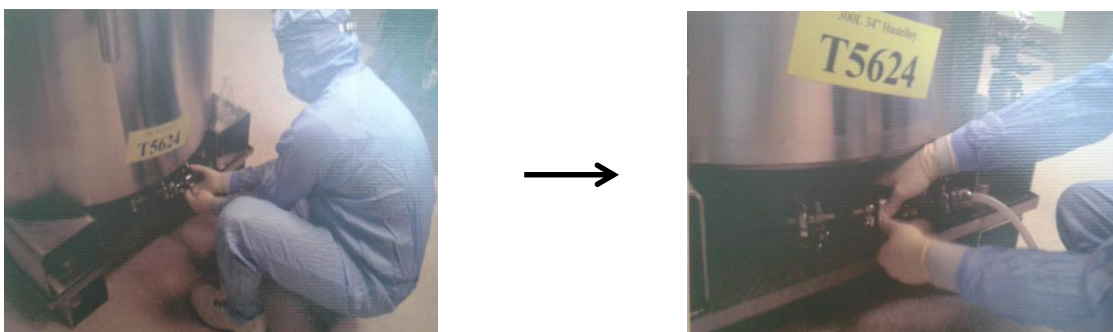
Operators doing the connection of the transfer tube after implementation of the adapter
